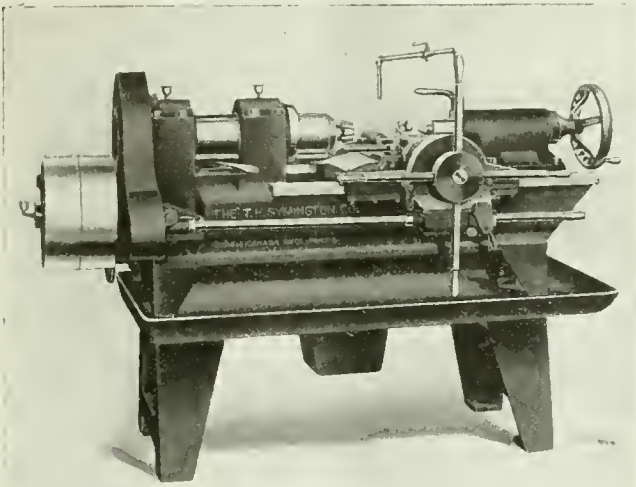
ROUGH TURNING LATHE WITH SPUR DRIVE CENTRE AND PROFILE CAM.
